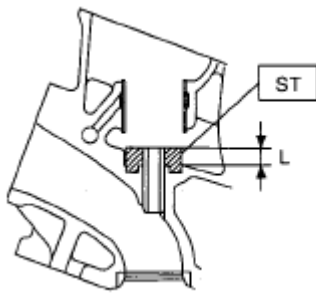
Identifying Cylinder Head Table And Valve Guide Remover
